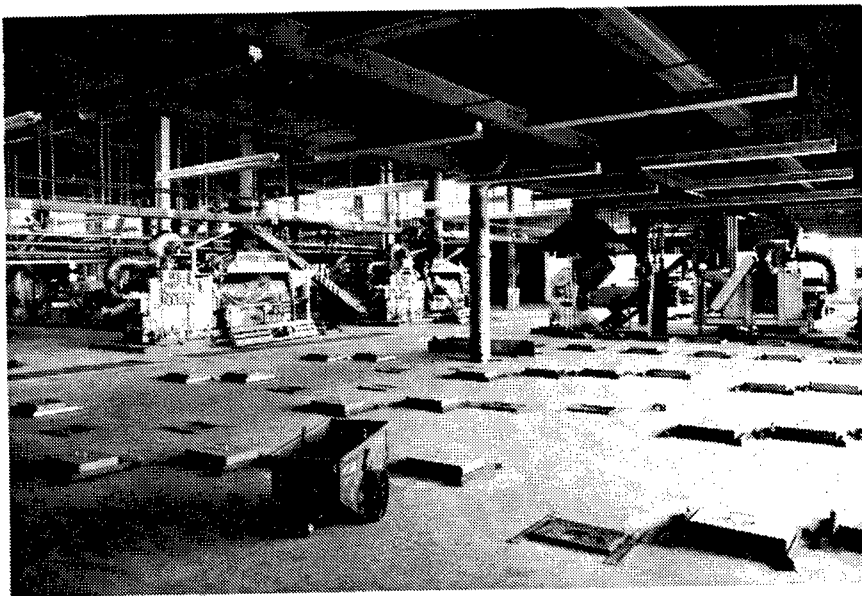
Building 102: Interior view of the in-place equipment on the second floor.
